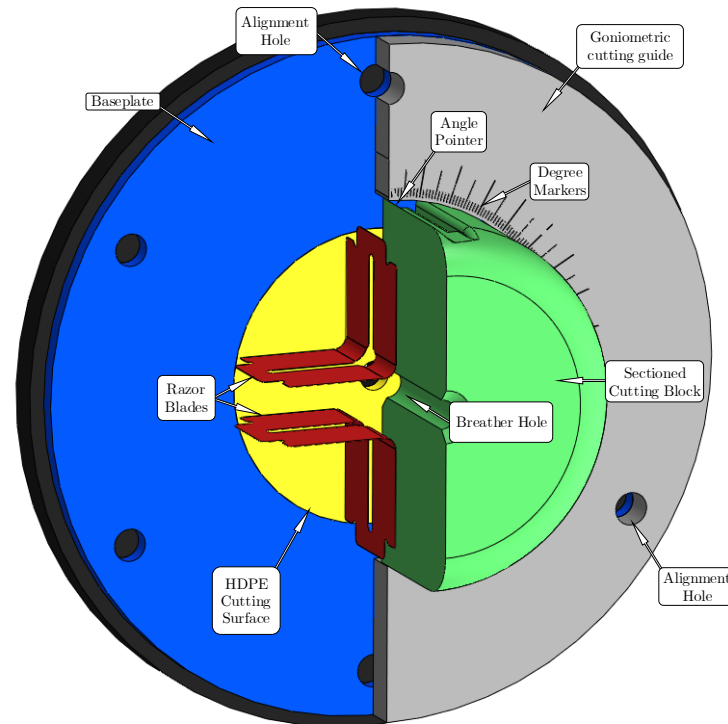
Partially sectioned goniometric cutting jig showing the positioning of the disposable razor blades in the cutting block
